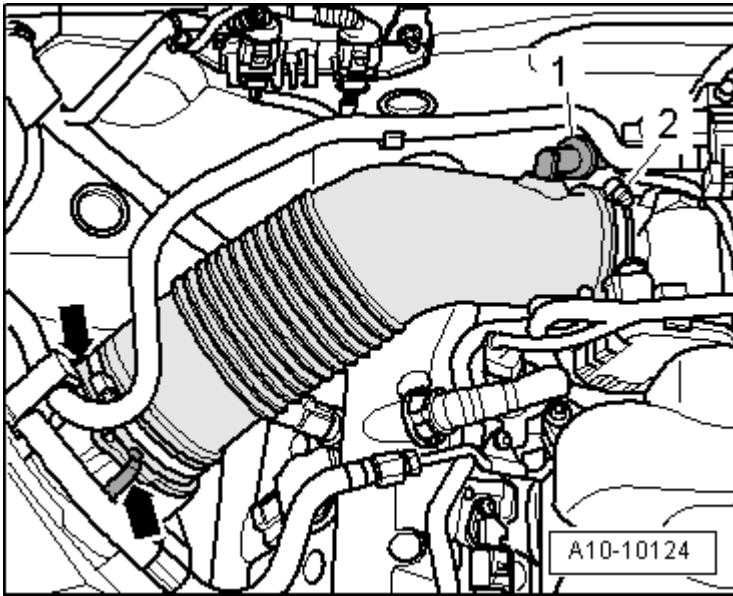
Locating Connector At Camshaft Position Sensor G40
